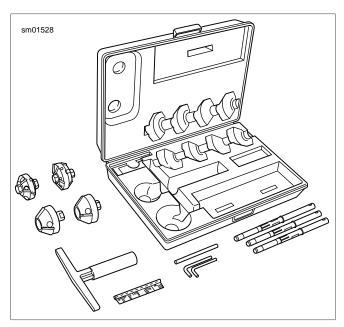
Neway Valve Seat Cutter Set (Part no. HD-35758-C)
